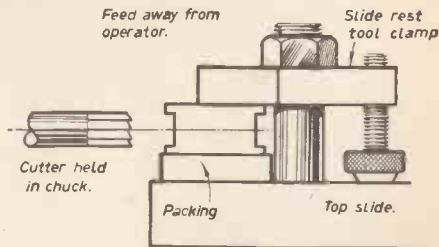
Milling grooves in the axleboxes, using the lathe and an endmill.
